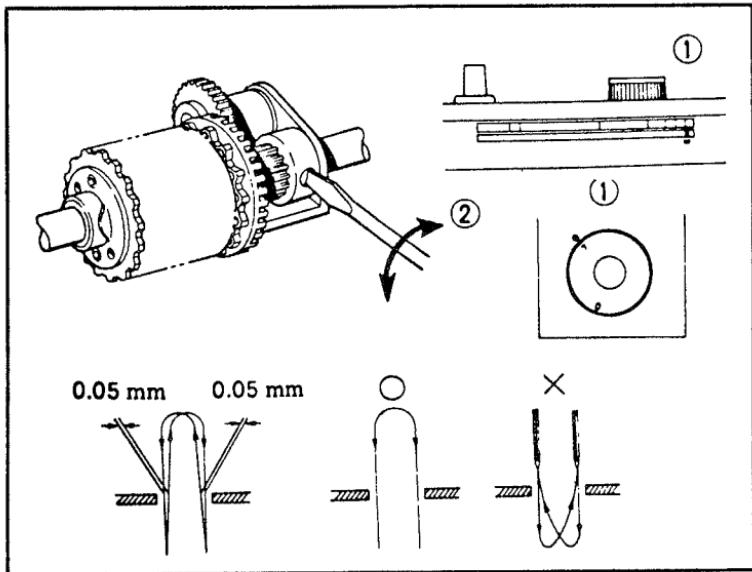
On the Brother XL5001, the needle bar swing is timed by changing the position of the main shaft gear to the cam shaft gear. When moving the gear, make sure no other mechanism in the machine moves, or your effort will be defeated.
